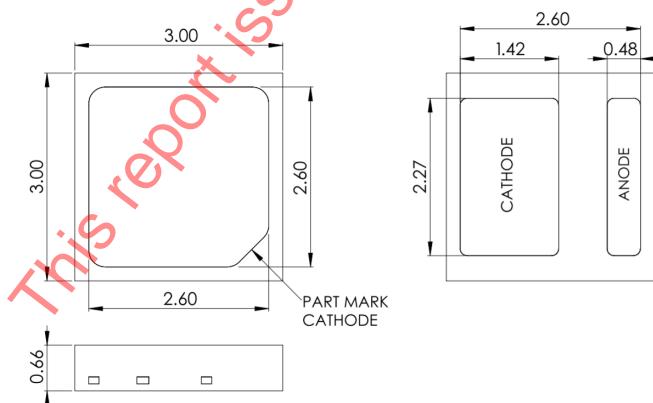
Mechanical Drawing for LUXEON 3030 2D Square LES. All dimensions are in millimeters.
